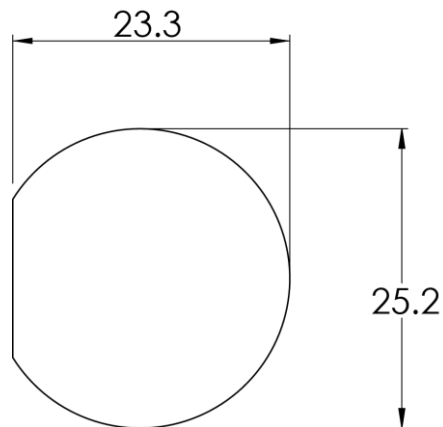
Remote Pendant Patch Board Mounting Hole Dimensions (mm)
